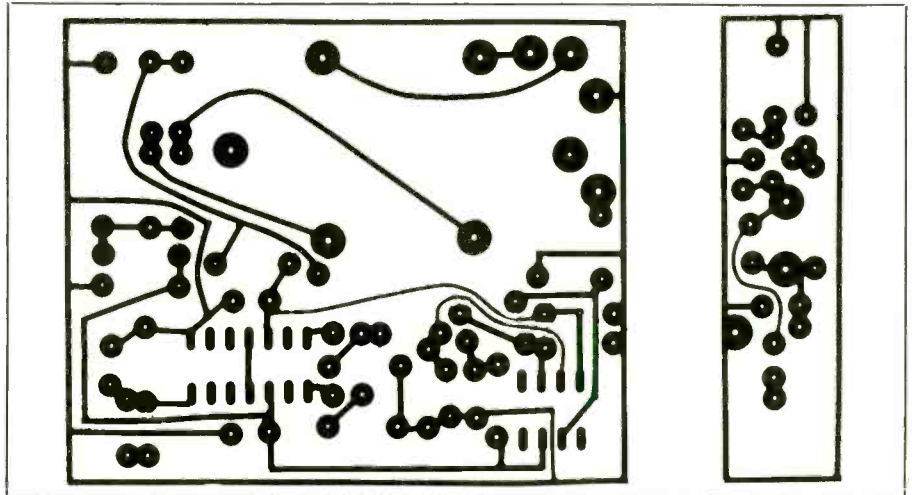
Actual-size etching-and-drilling guides for receiver and transmitter.
